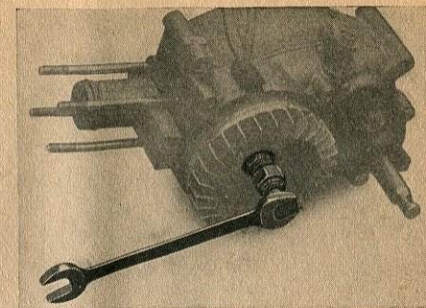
Magneto Withdrawing Tool, Part No. for Bosch Magneto 093006, for Siba-Magneto 093009
